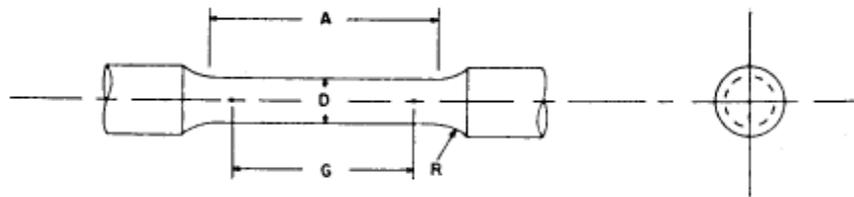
Tensile specimen dimensions (ASTM E8/E8M, 2012)
